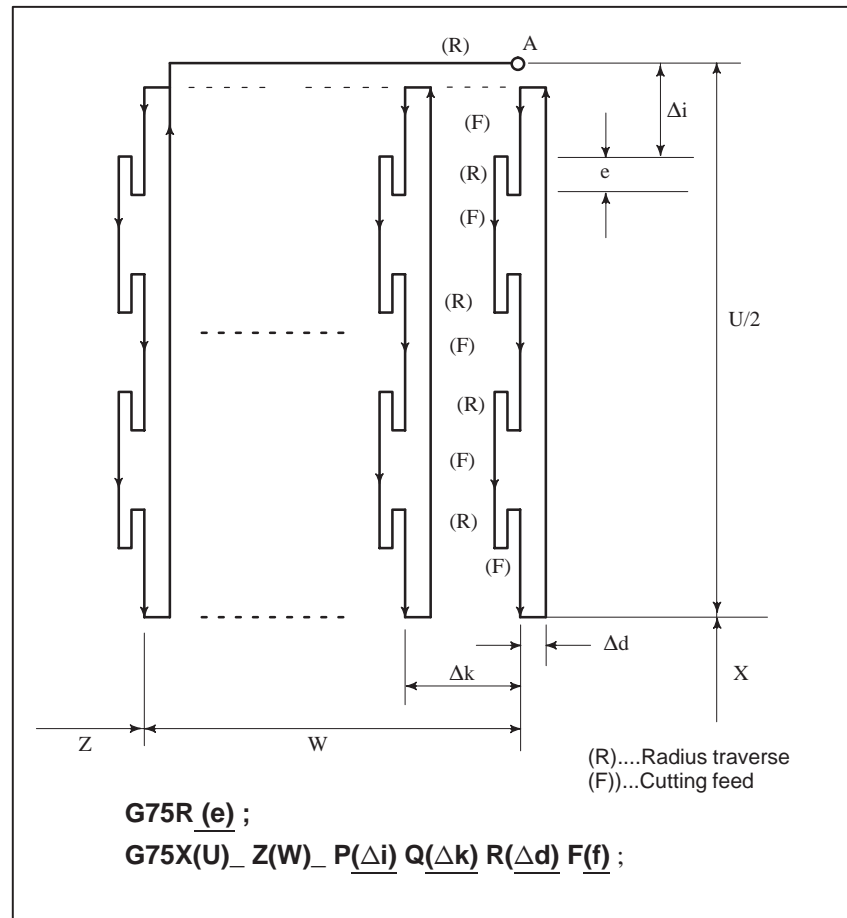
Cutting Path in Outer Diameter / Internal Diameter Drilling Cycle
